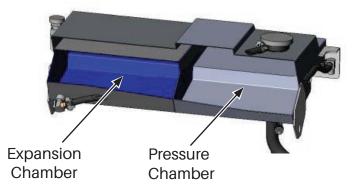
Typical Integrated Expansion Surge Tank Cutout
